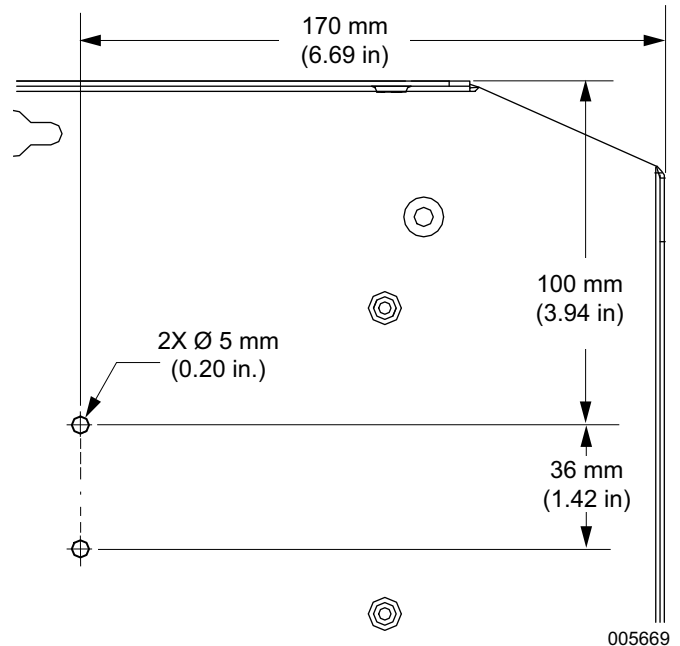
Hole Locations—8 kVA Engine Divider Panel
